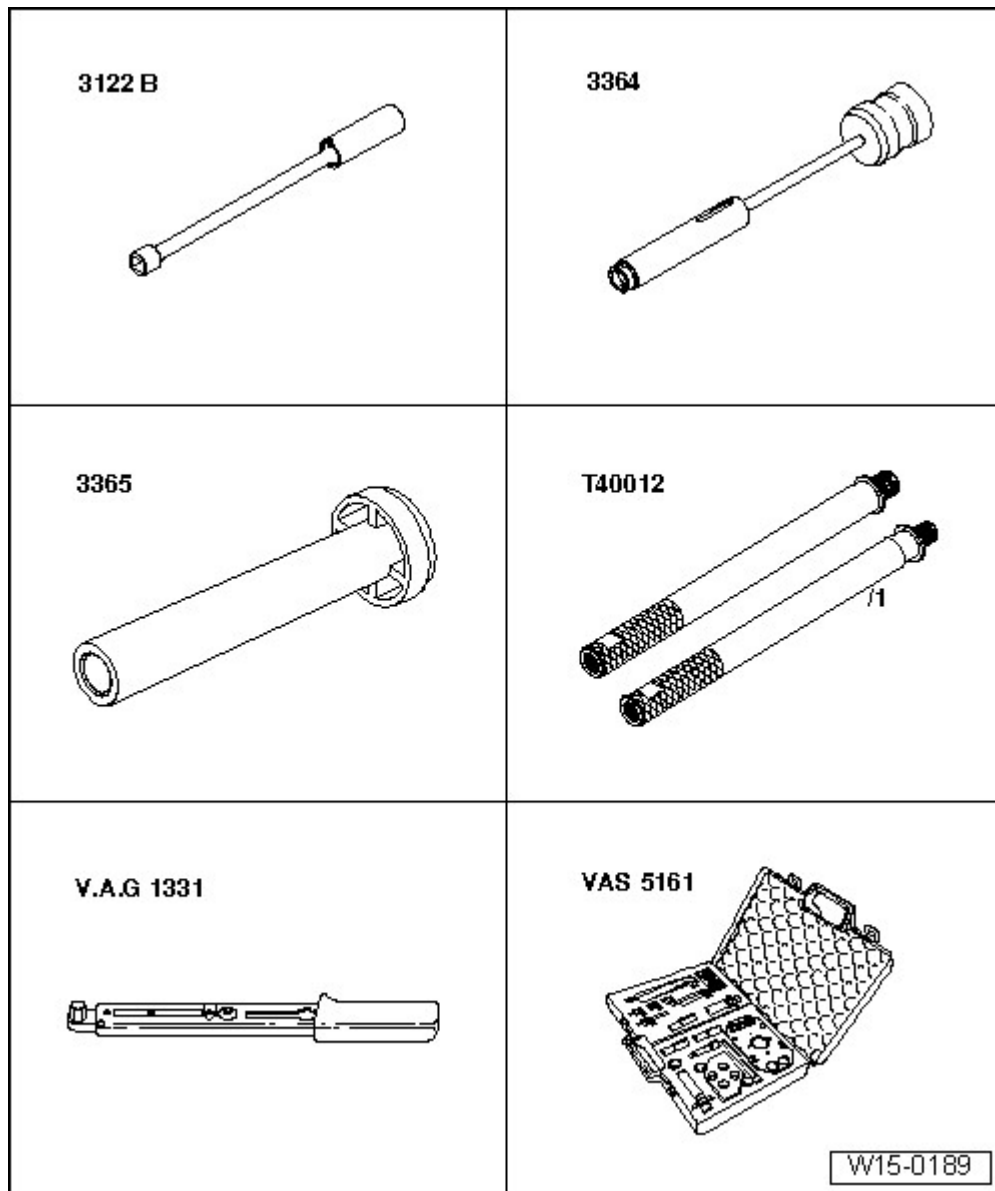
Special Tools And Workshop Equipment (8 Of 8)
